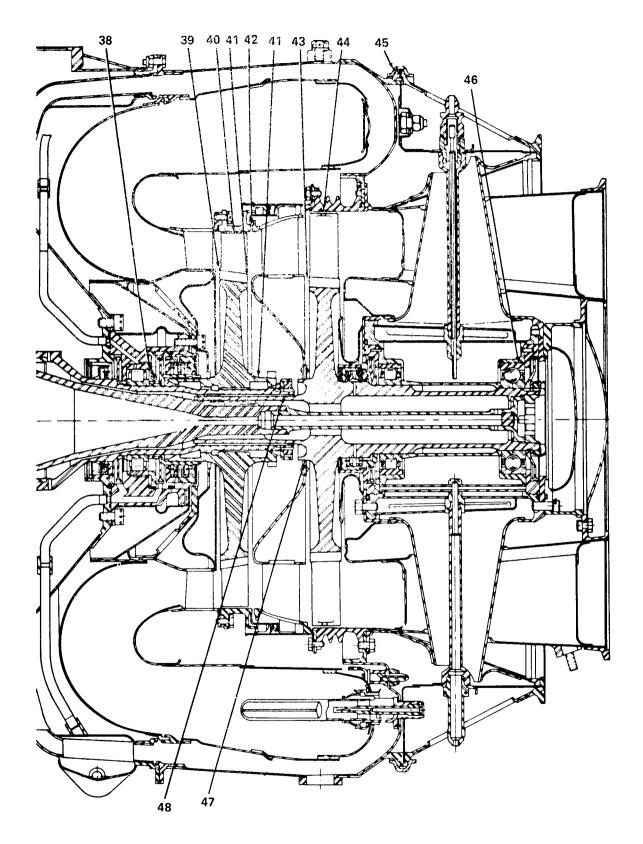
Fits, Clearances and Backlashes (T53-L-11 Series Engines) (Sheet 4 of 5)
